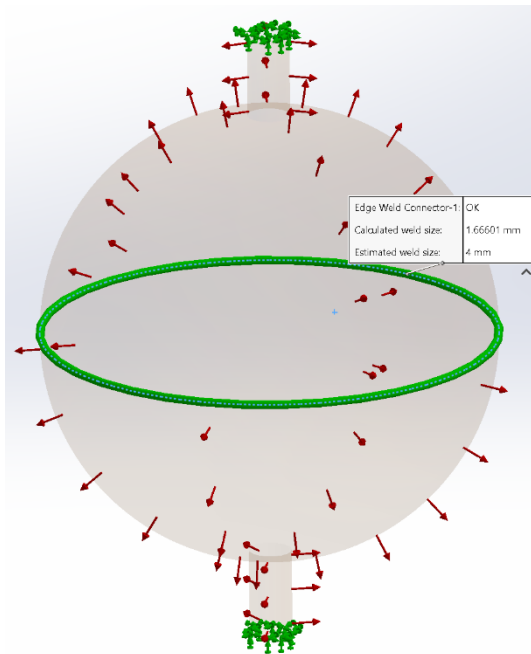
Traditional PV Weldment @ 885 PSI
